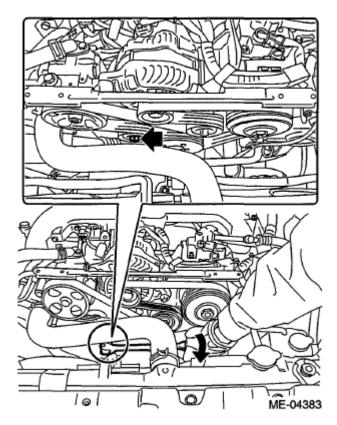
Rotating Tool Clockwise Courtesy of SUBARU OF AMERICA, INC.
